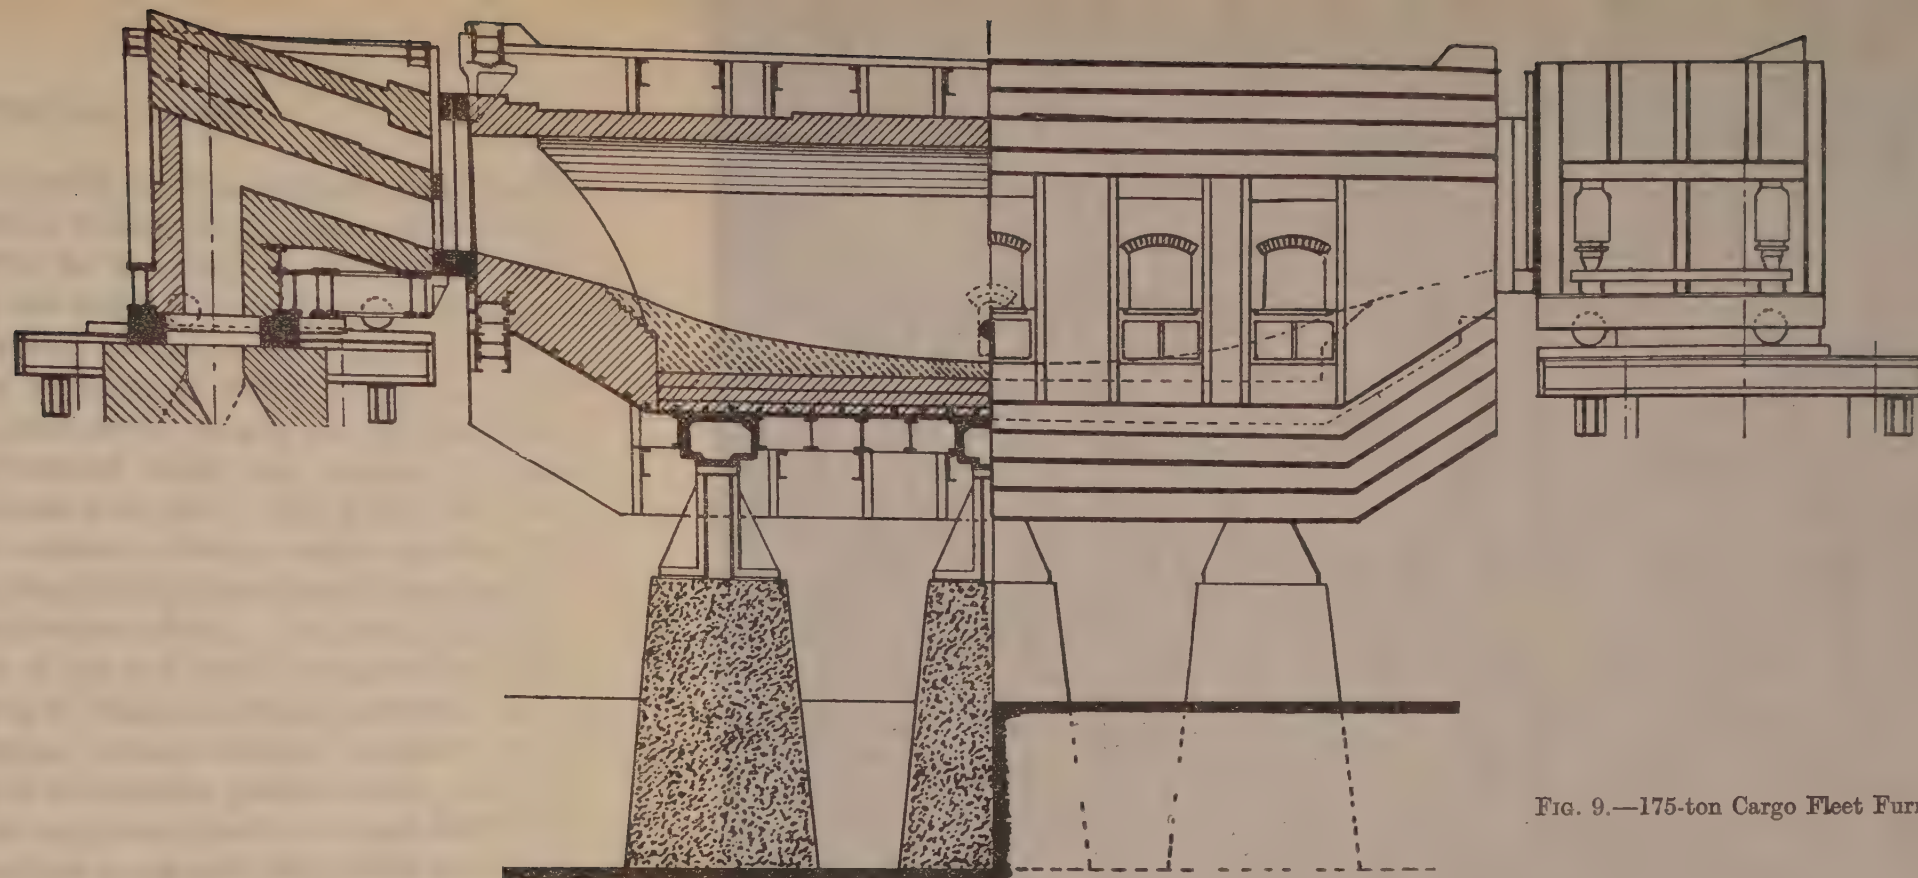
175-ton Cargo Fleet Furnace with Open Block.
